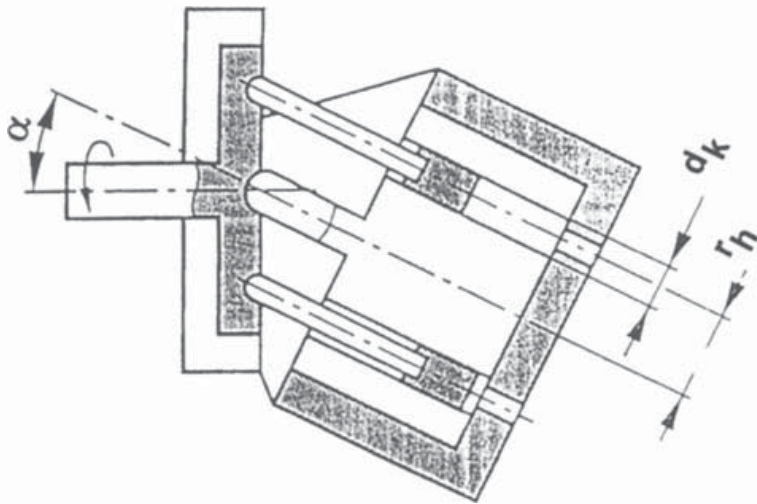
Sketch of an axial piston pump bent-axis design showing displacement angle α .
